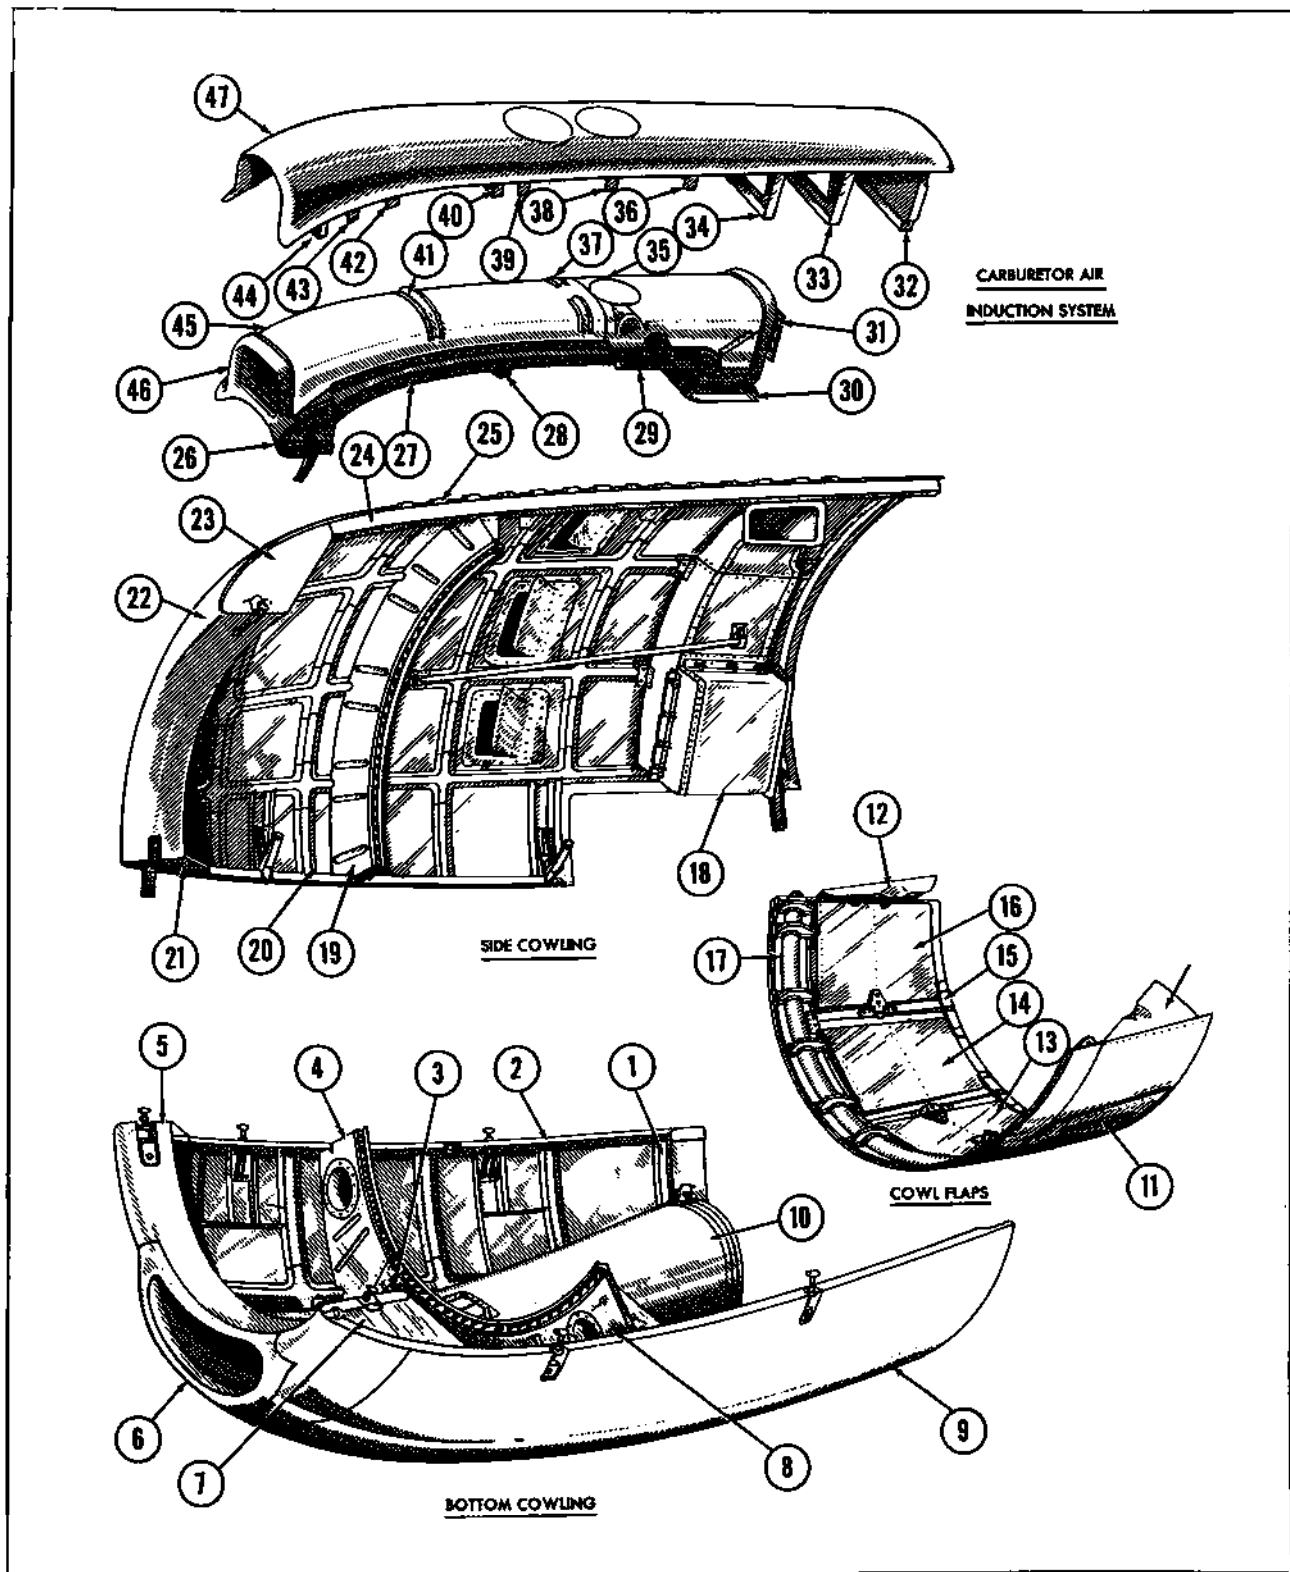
(SHEET 2 of 2 SHEETS) — ENGINE COWL STRUCTURE
